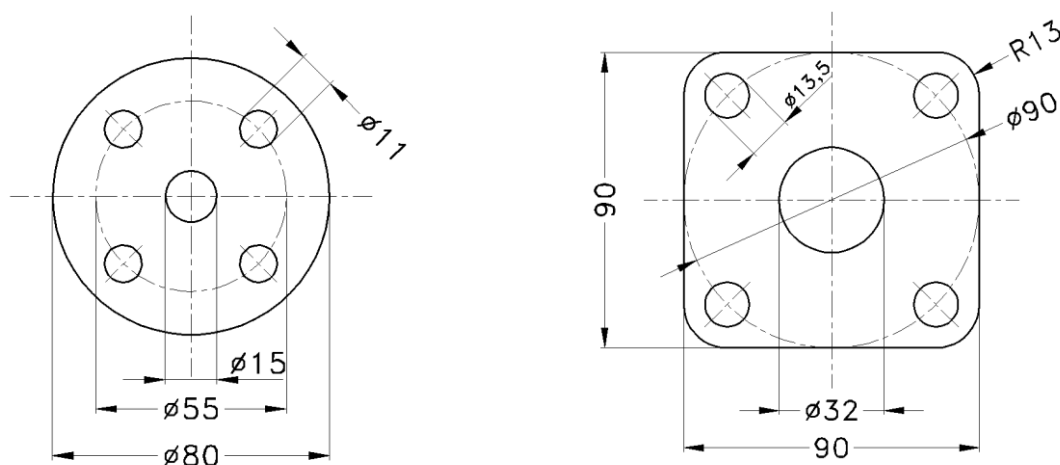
Round type flange interface for DN15 and Square type flange interface for DN32
